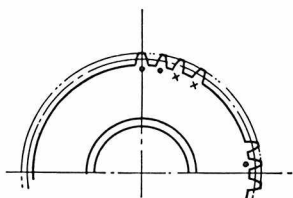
View of timing marks used on some clutch gears. Refer to text.
